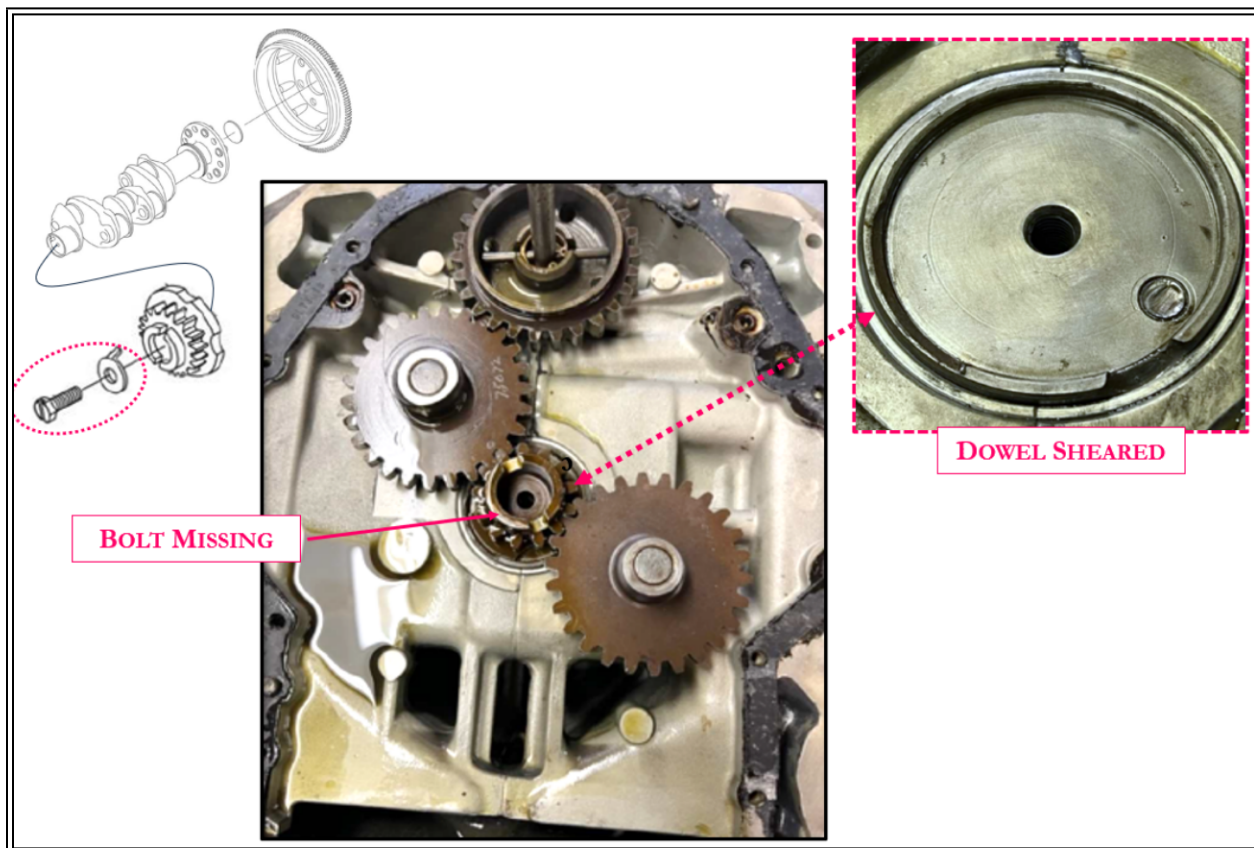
Accessory Housing Removed (pictures provided by mechanic)
